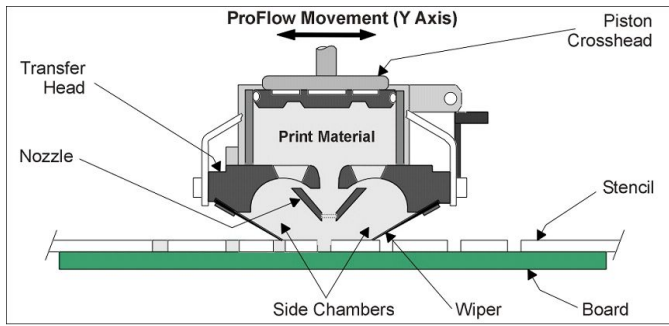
Enclosed Printhead Printing [Courtesy DEK Printing Machines]
